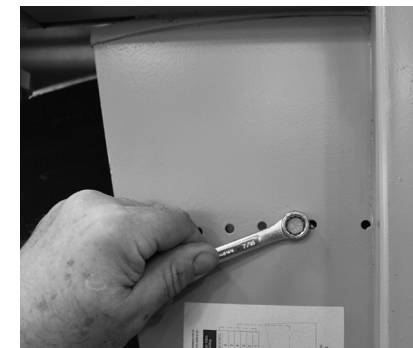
To adjust the purge, remove the adjusting bolt.
